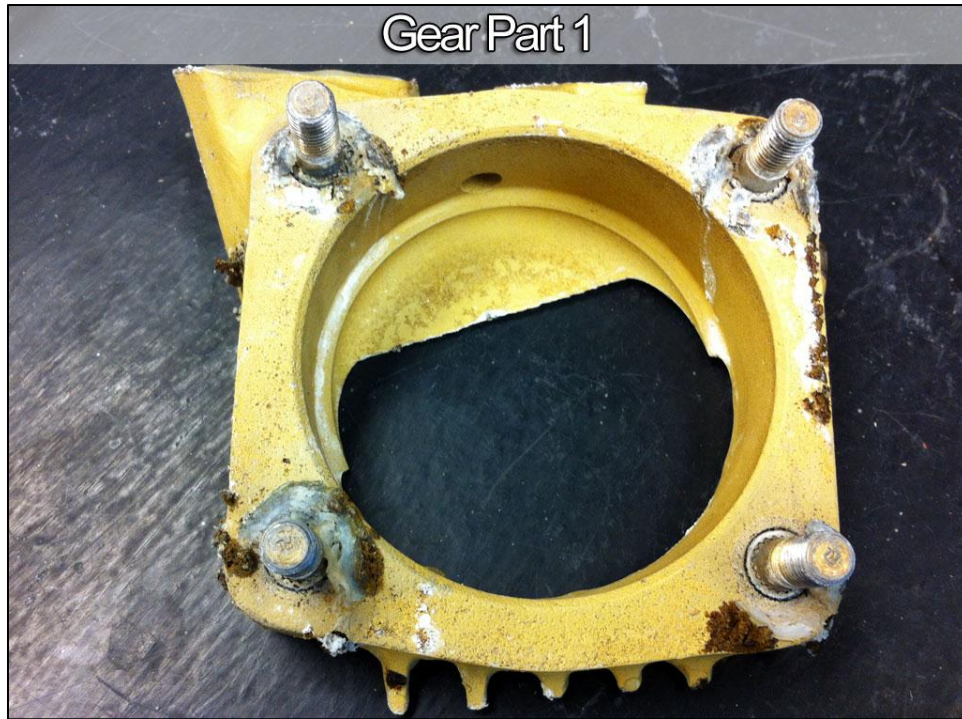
Helicopter gear Part 1 after 16 hrs of B117 test.
